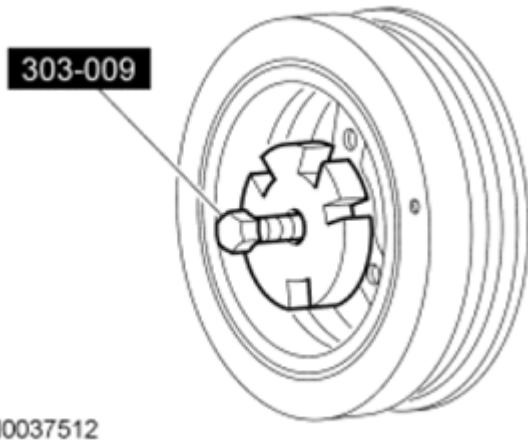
Removing Crankshaft Pulley Using Crankshaft Vibration Damper Remover
